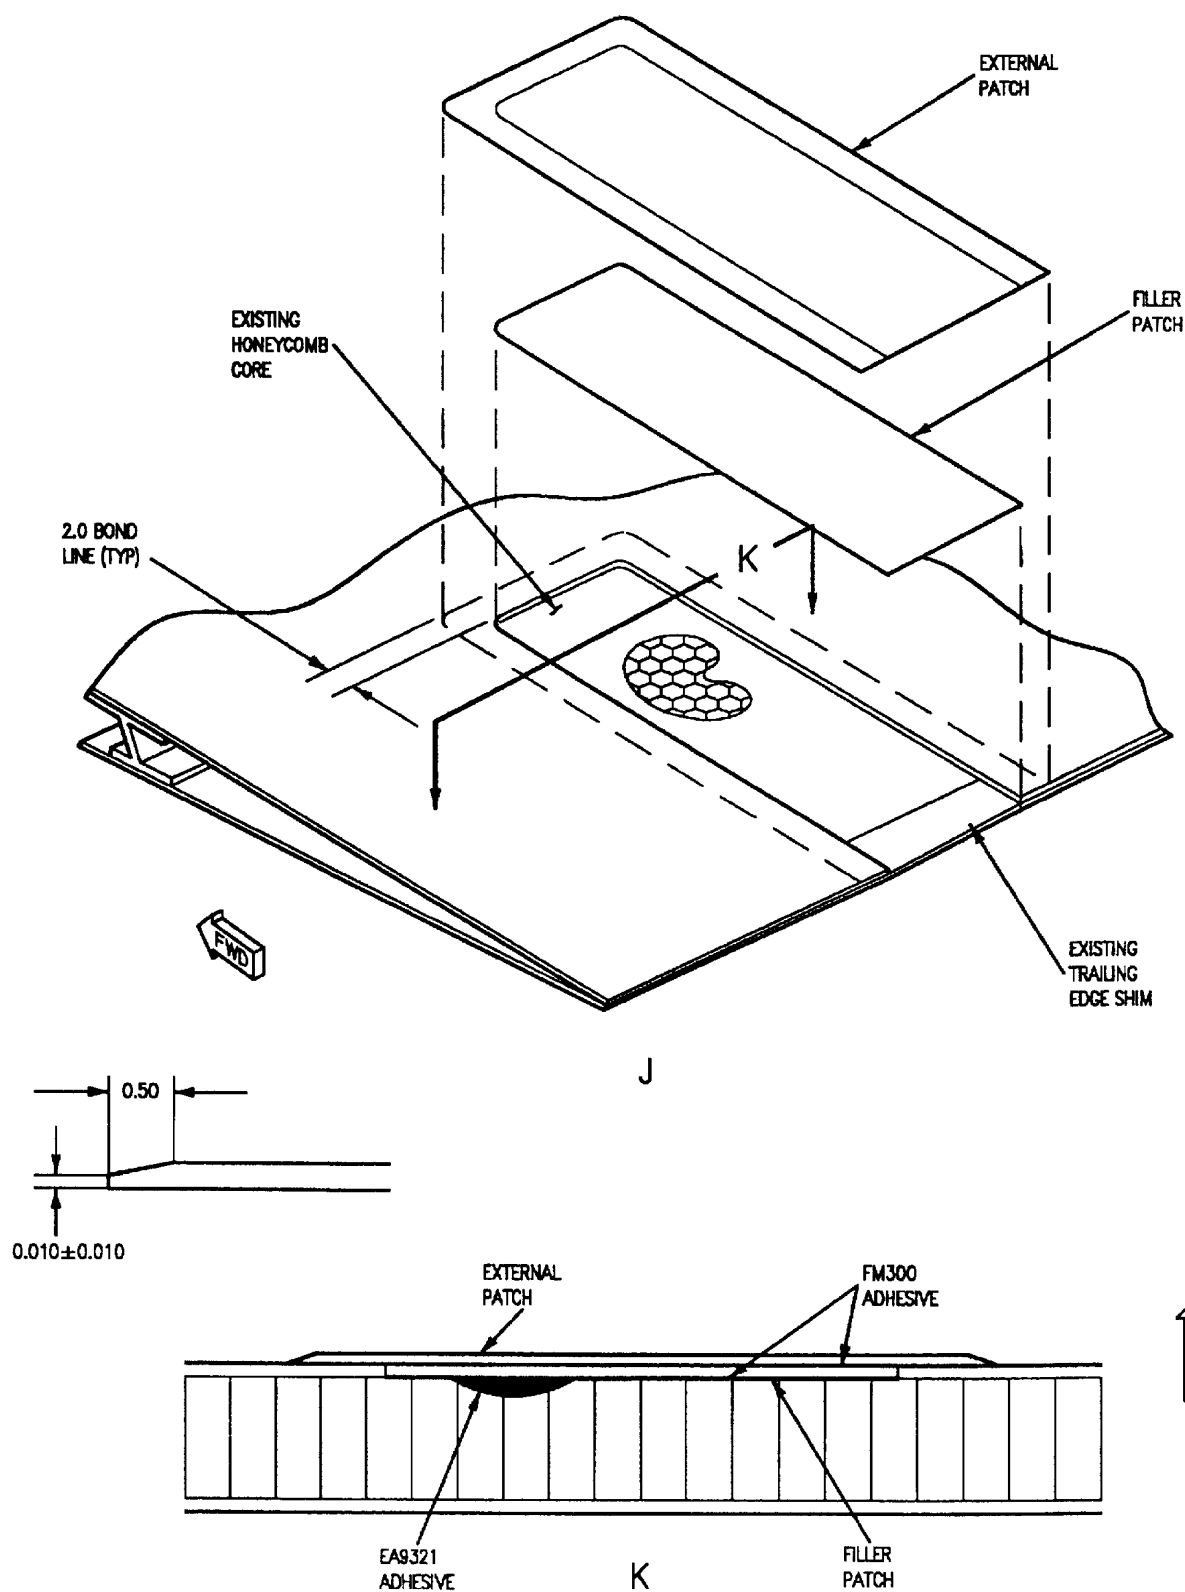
Outboard Trailing Edge Damage Repair (Sheet 6)
